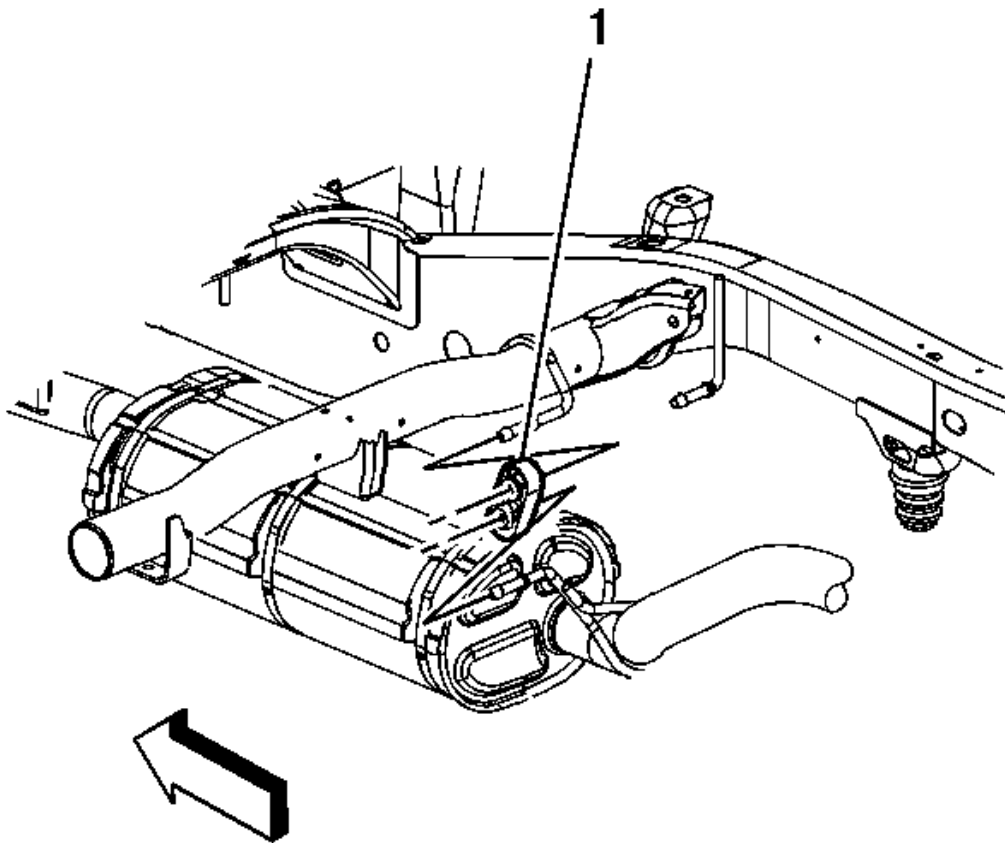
View Of Intermediate Muffler Assembly Insulator
